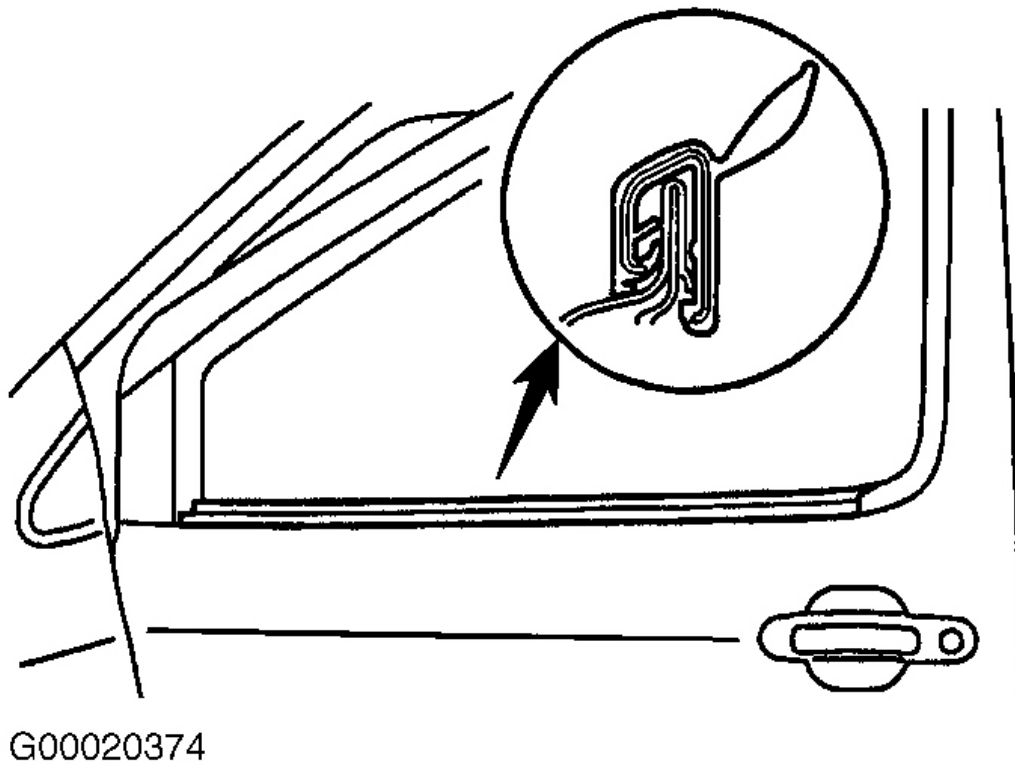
Identifying Front Door Molding Attachment Points (Land Cruiser & Sienna)
